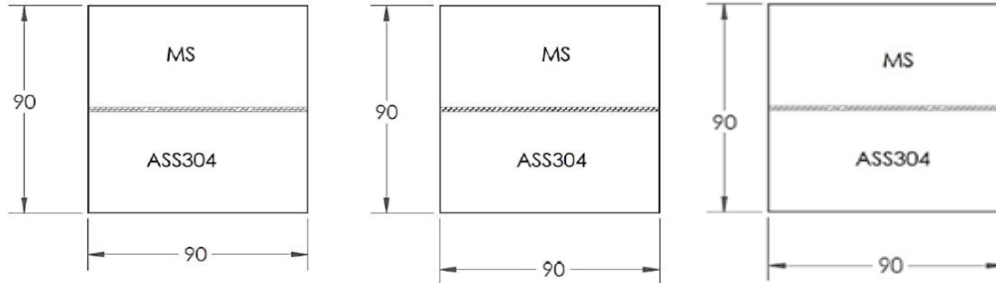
Specimens of sheet metal welds of Mild steel & ASS 304 in different sheet roll directions
